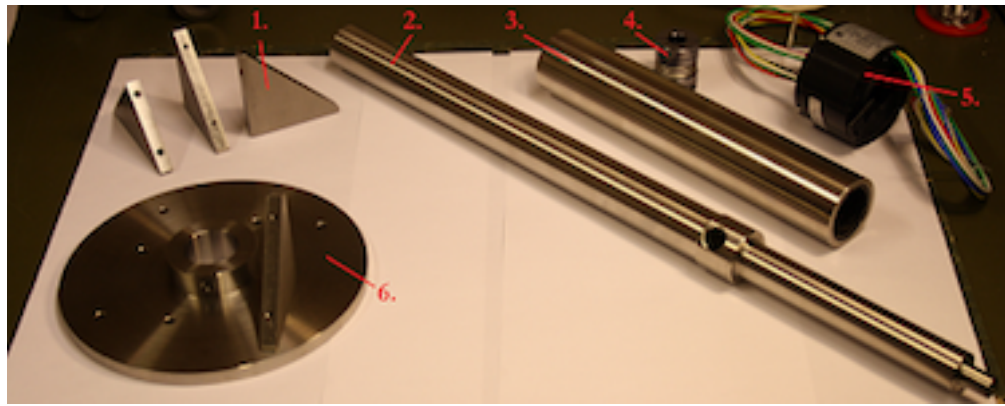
Mechanical parts of the rotating device on a table before assembly. Starting from top-left: 1. Supporting block for PWB. 2. Rotating axle. 3. Outer part of the rotating axle. 4. Coupling. 5. Electric slip rings. 6. Support jig made from stainless steel.
